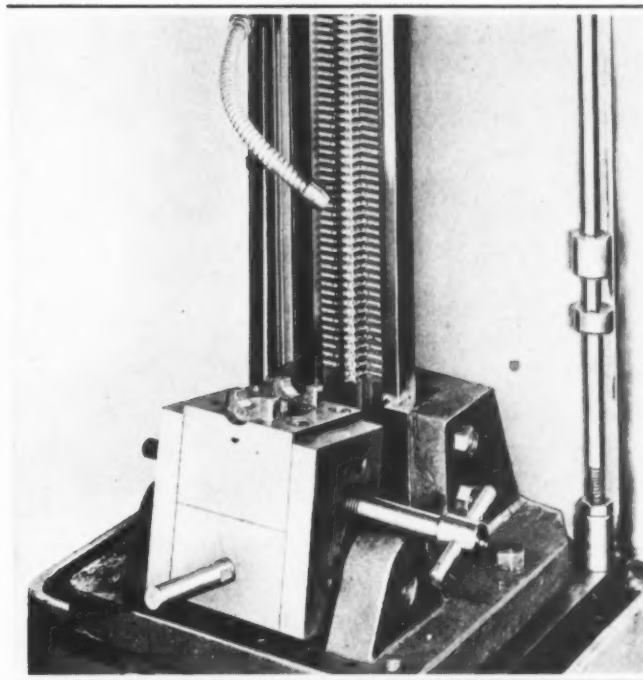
Open (or Loading) Position of Fixture Shown in Fig. 4
